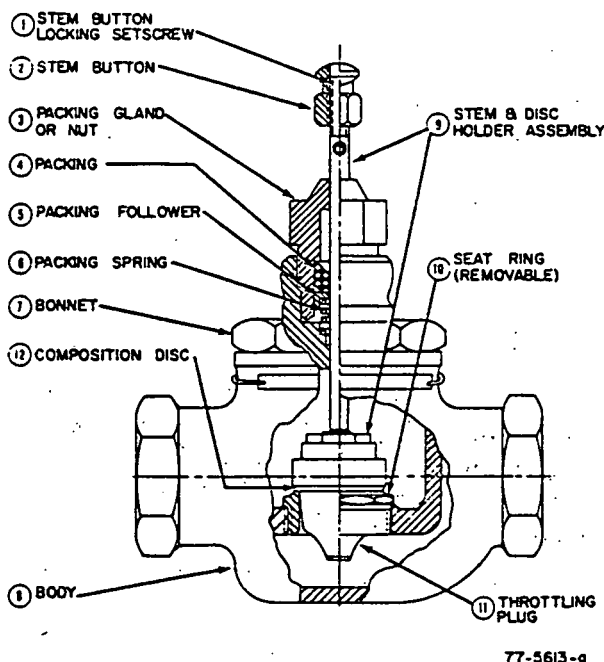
Cutaway of Typical V5011A Screwed Type Body.
